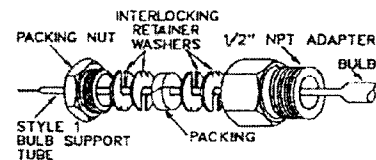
Part No. FTG13A-600R packing nut assembly.
